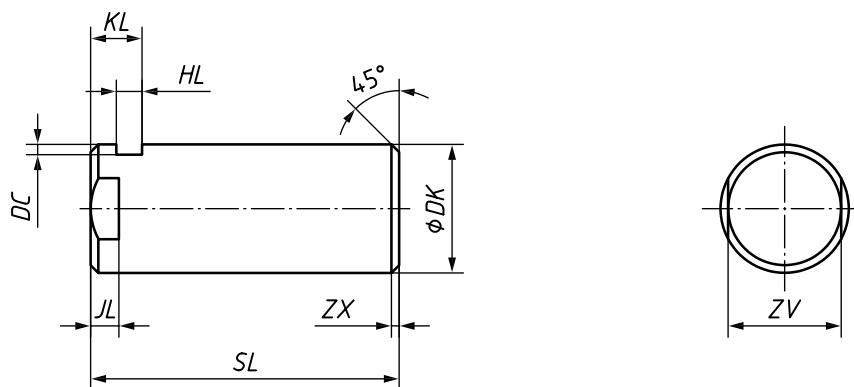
AA6-L — Pivot pin, spherical bearing, locking plate
